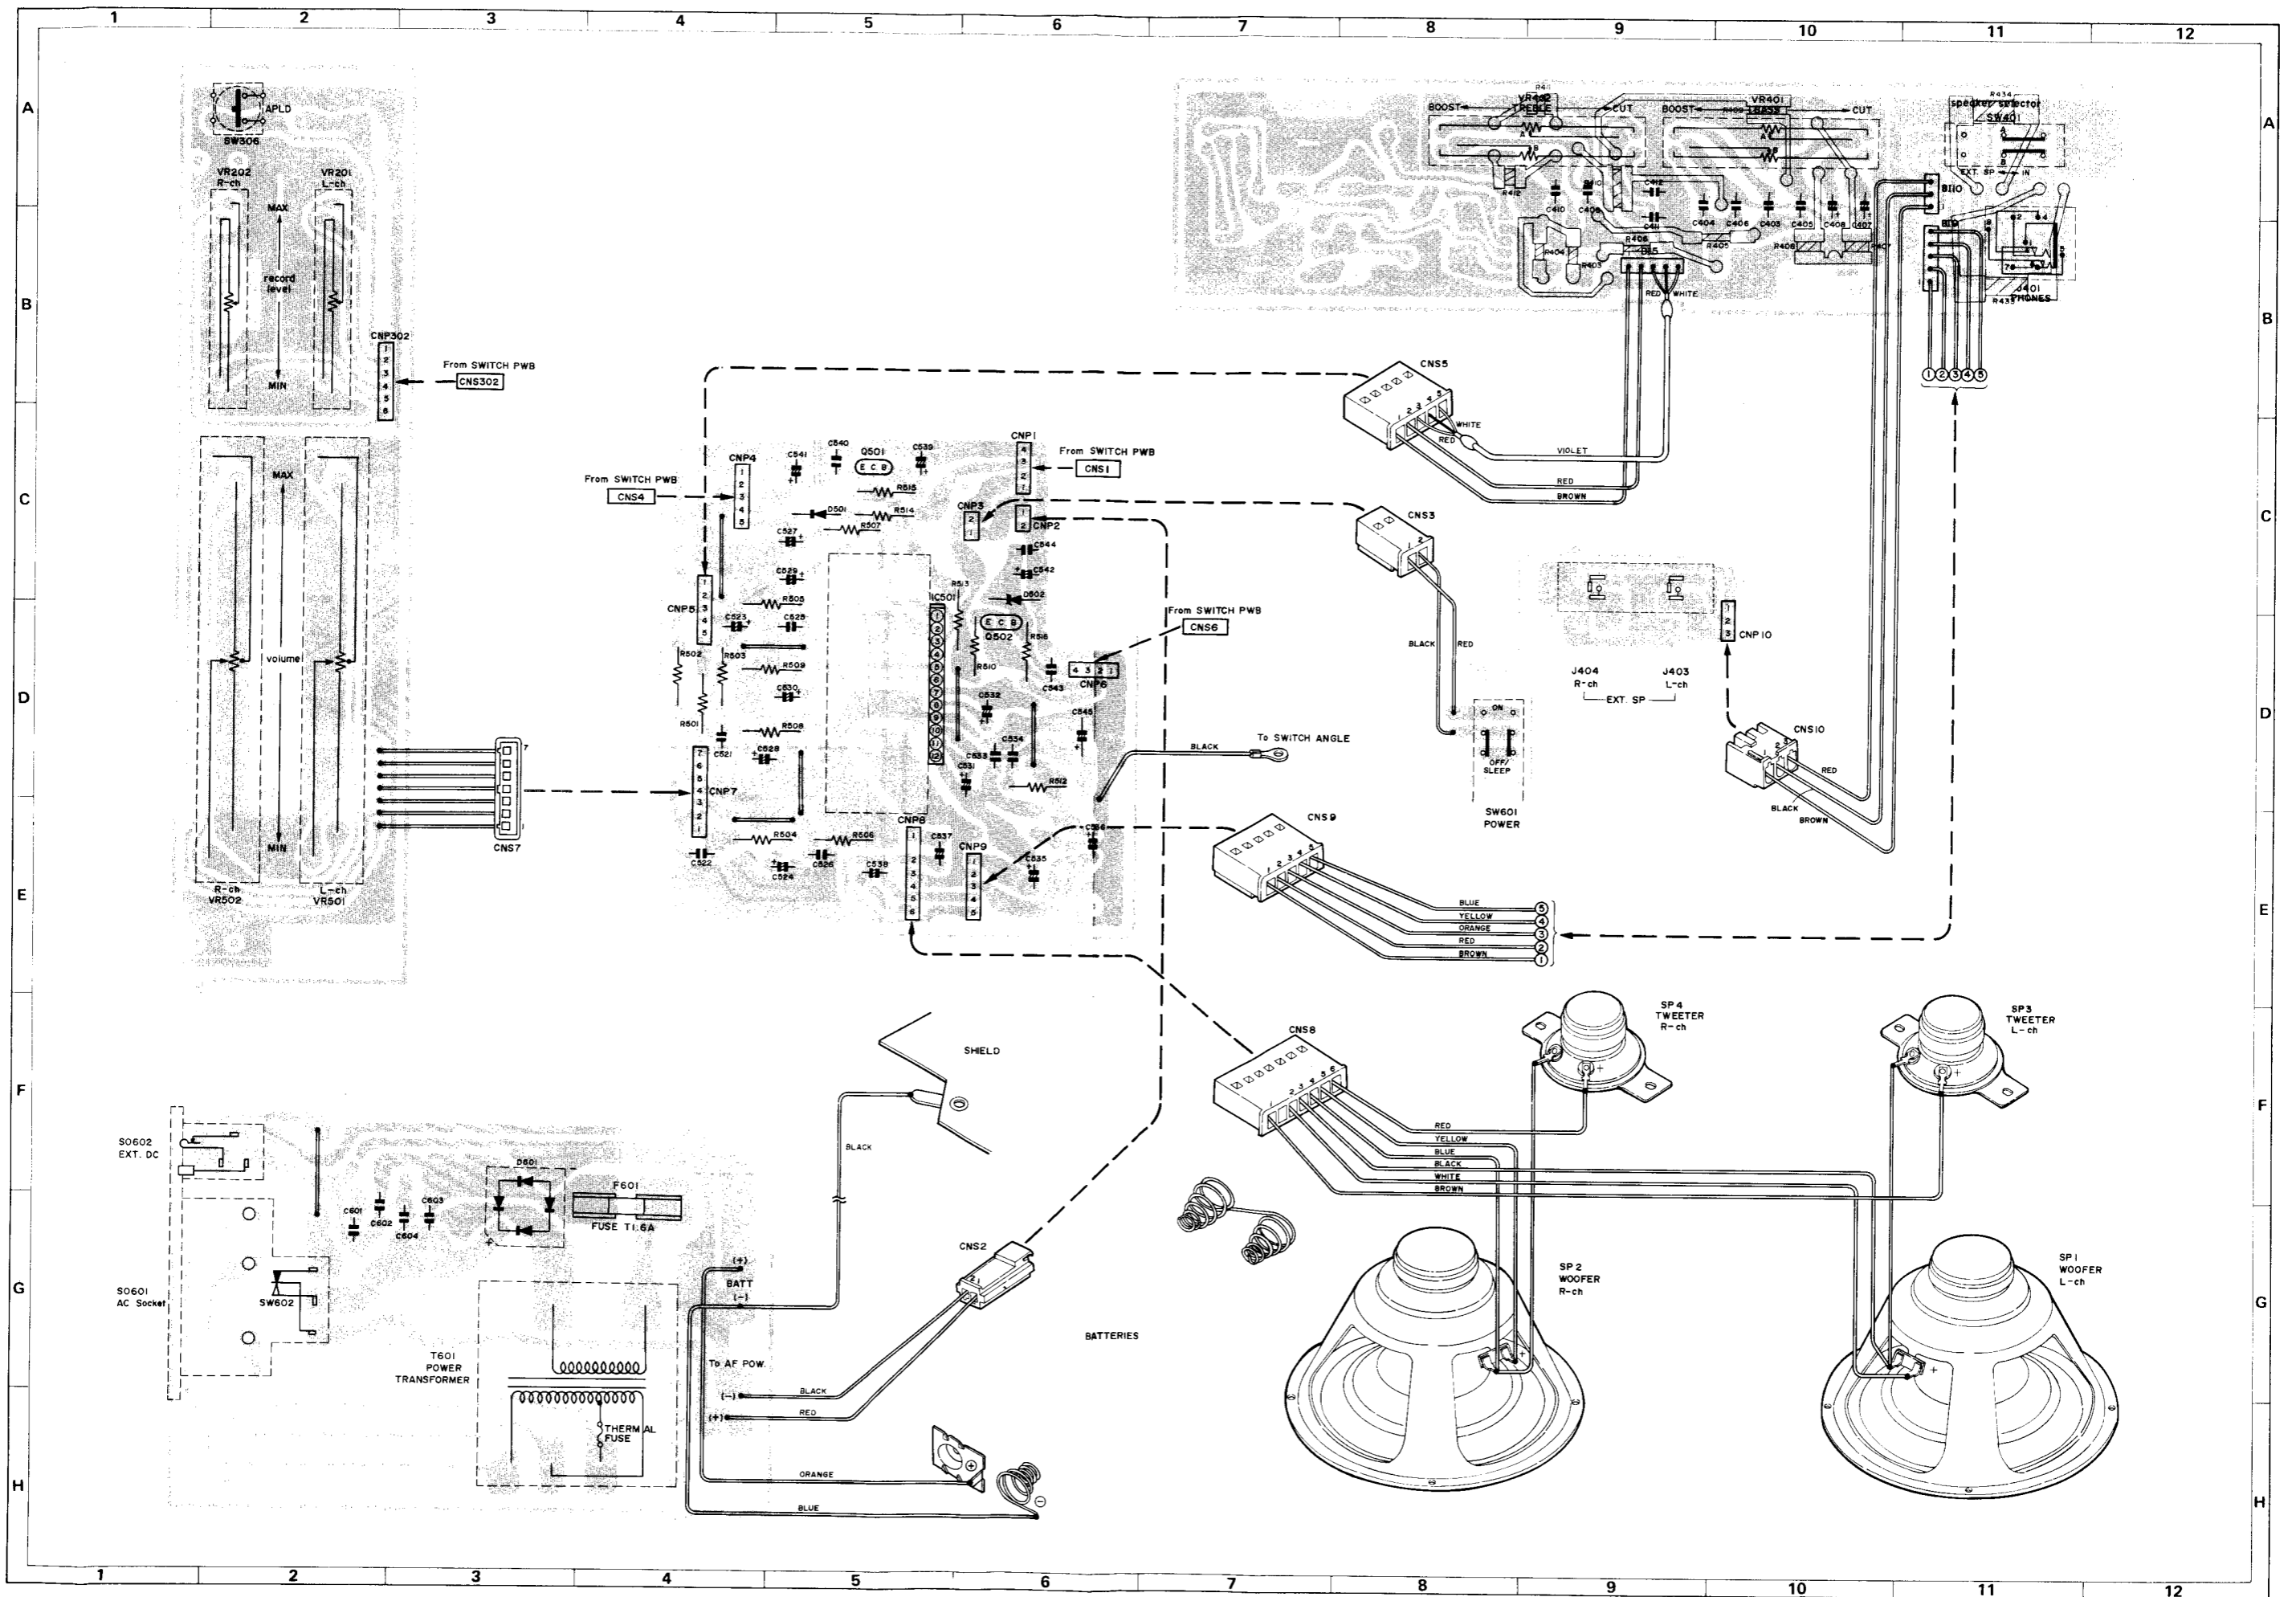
WIRING SIDE OF PRINTED WIRING BOARD (2/3)
